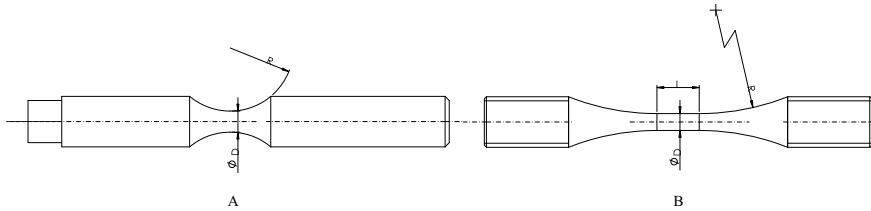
The geometry of specimens used for fatigue tests: a Rotating bending ($R = -1$), b tensile ($R = 0.1$)
